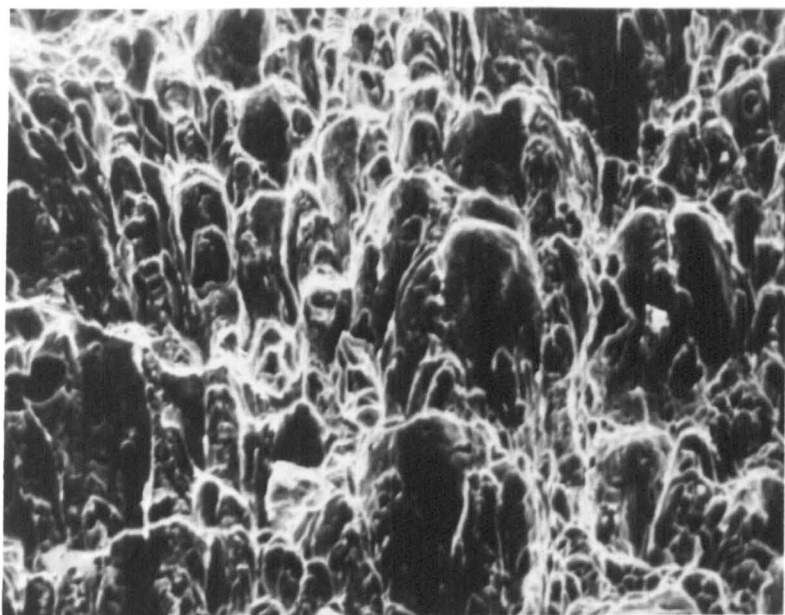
This SEM fractograph is taken about  $\frac{1}{2}$ -way-down the fracture surface of the specimen illustrated in Plate 11.18, ( $0^\circ$  tilt, 500 X). It shows a complete quasicleavage fracture.
